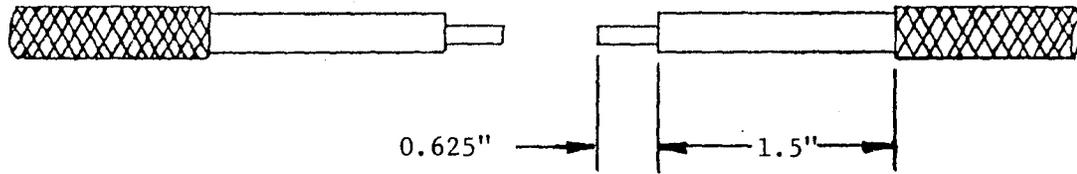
Shielding and Bared Conductor Dimensions for Splicing.
